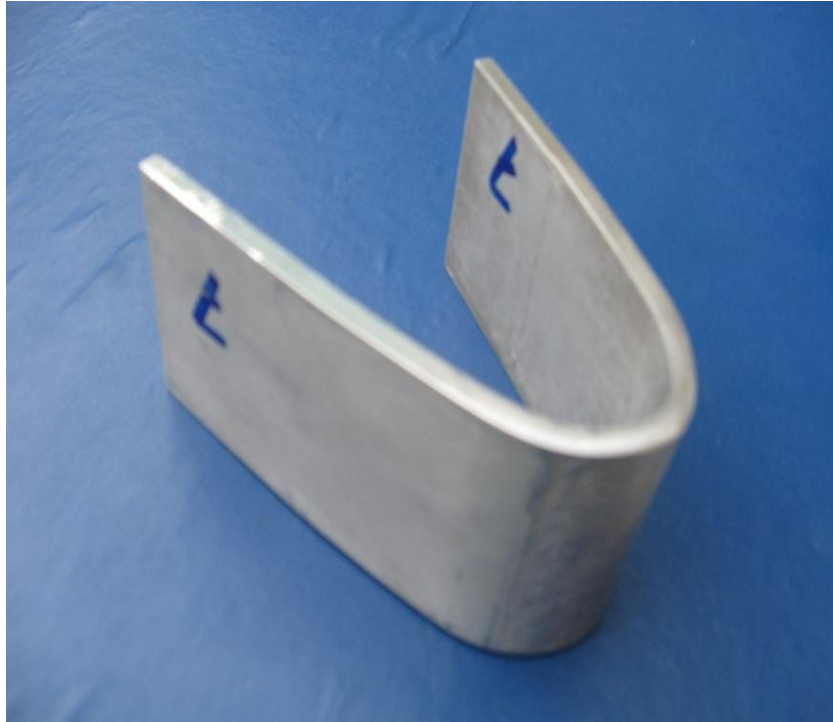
(b) Bending specimens for the case of 6061-T6 on advancing side
